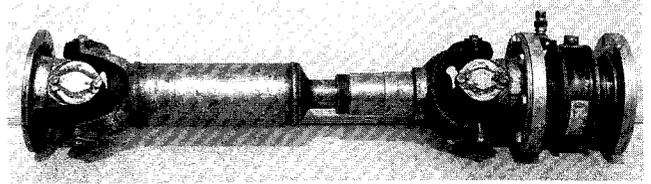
Spicer series 1610 drive shaft requiring only the adapter flanges on the torque meter.
